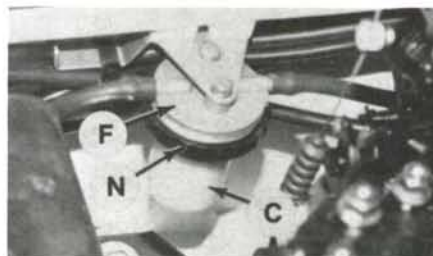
An inline fuel filter assembly (F) is used on all models. Unscrew ring nut (N) to withdraw cup (C) with sealing ring. Filter element is now accessible.
